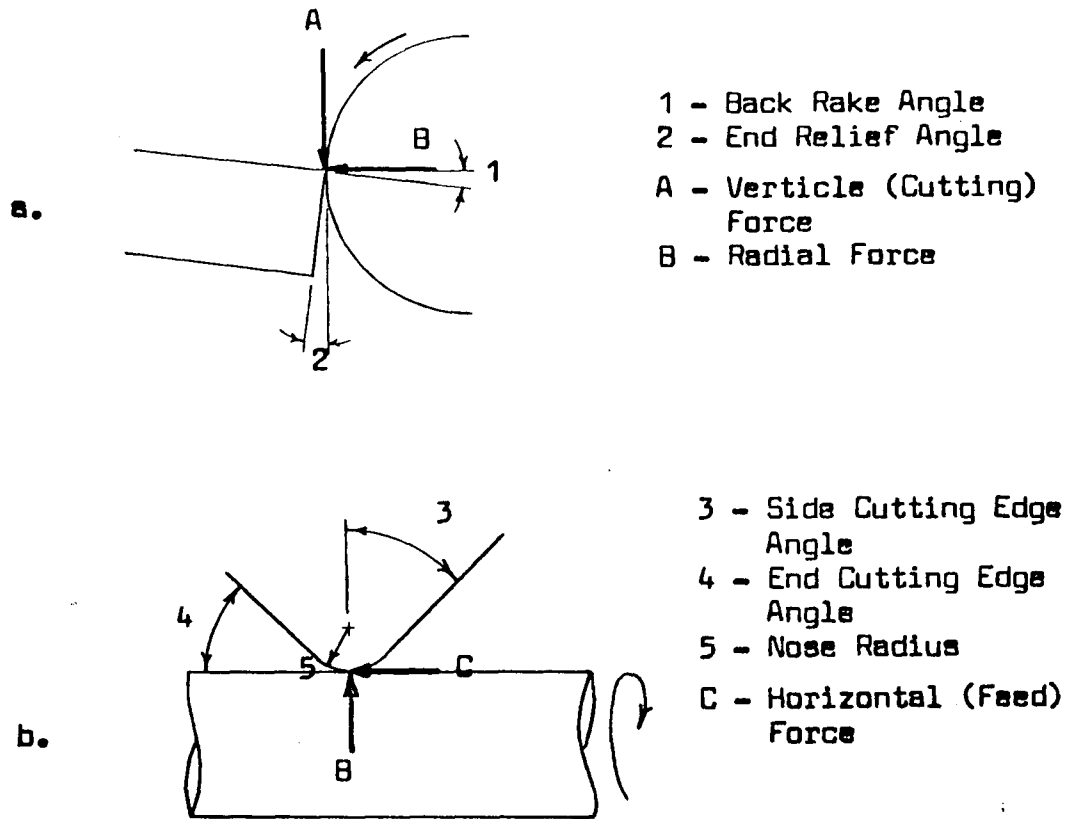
COMPONENTS OF TOOL GEOMETRY AND MACHINING FORCE
